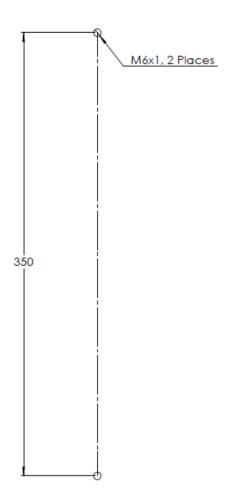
Mounting hole and cut-out specifications for PIU Duct mount
